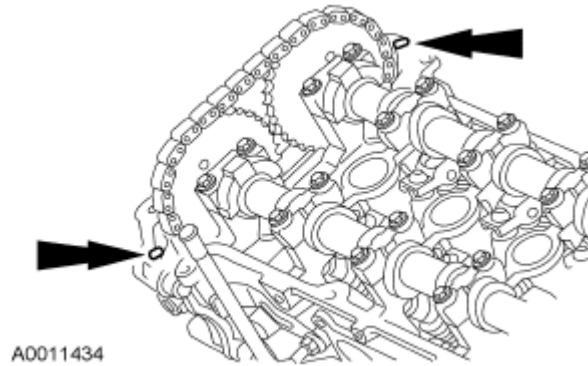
Applying Dot Of Silicone Gasket And Sealant At Cylinder Block
